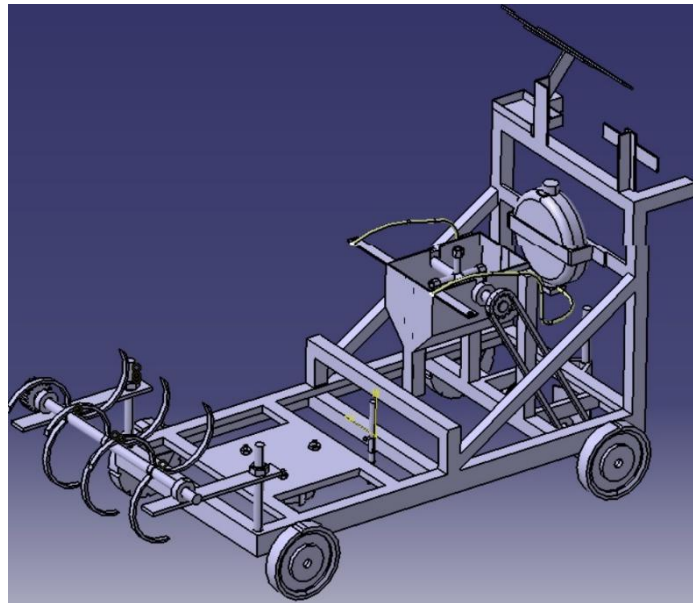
Design of Bluetooth Controlled Multipurpose Agriculture Machine
